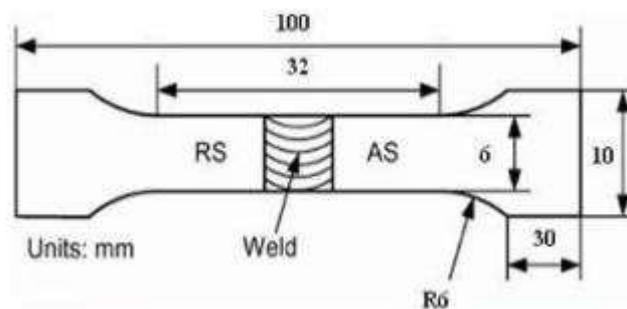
Dimensions as per ASTM E8 standard for tensile testing.
